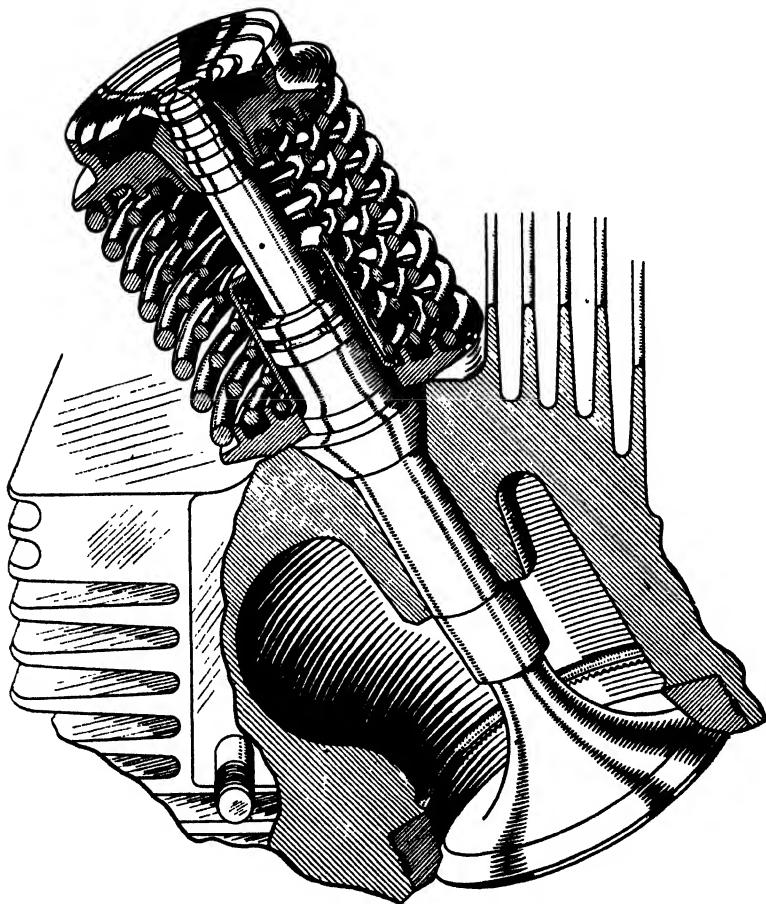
Perspective View of Valve, Valve Guide and Spring Assembly.
